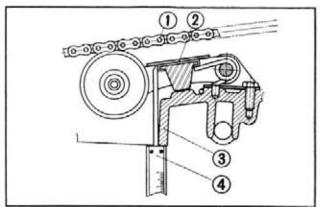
① Primary chain ③ Lower crankcase ② Primary chain tensioner ④ Vernier caliper
